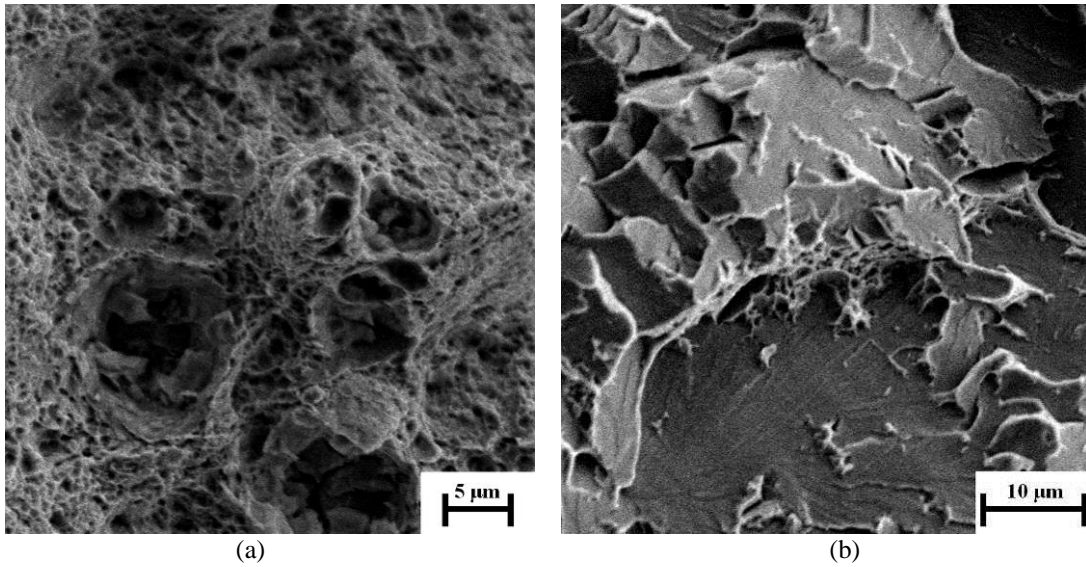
Tensile fracture surfaces of the C bloom specimens; (a) ductile fracture of the surface samples; (b) cleavage fracture of the core samples.
